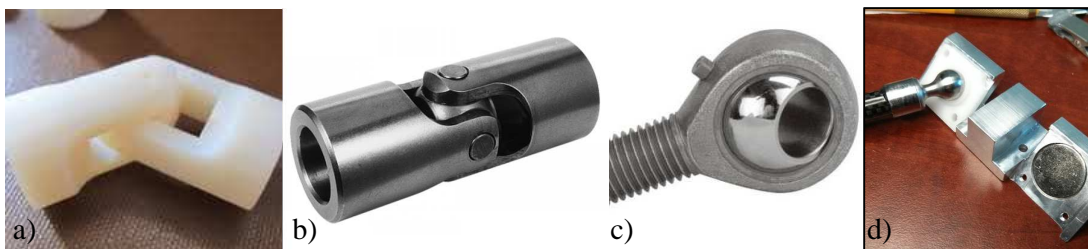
Manipulator types of joints considered: a) 3D printed universal joint; b) industrial cardan joint; c) rod end bearing; d) magnetic joint.
